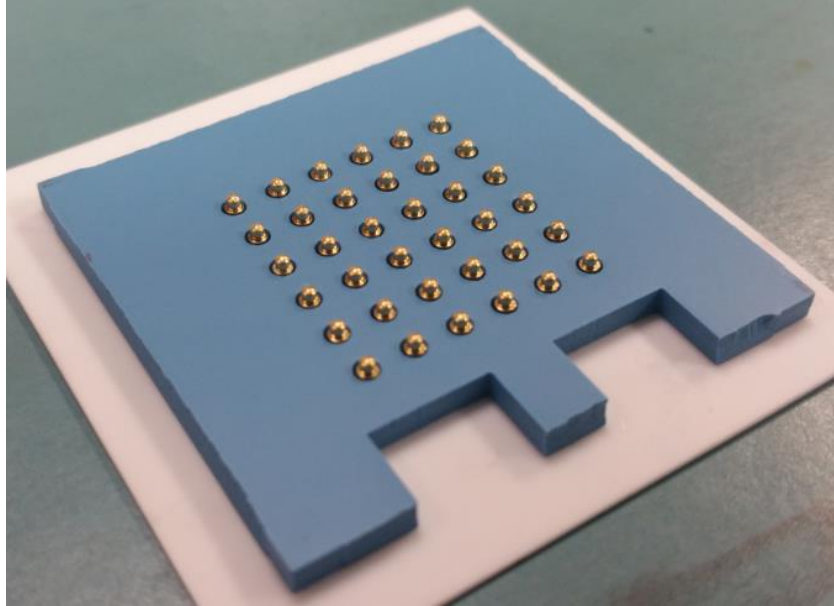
Fabricated LTCC spring-loaded interposer
